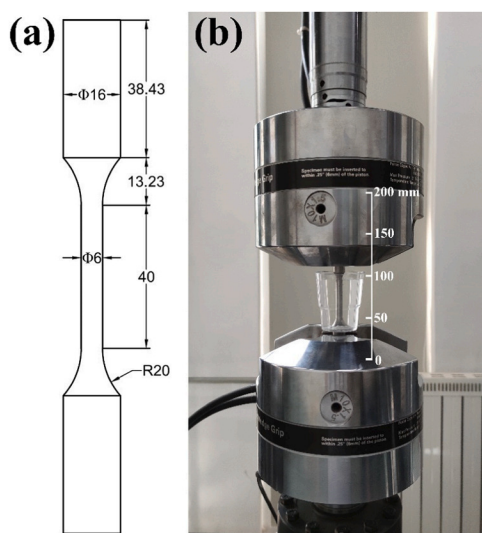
(a) Fatigue specimens geometry in mm and (b) picture of corrosion fatigue test.
